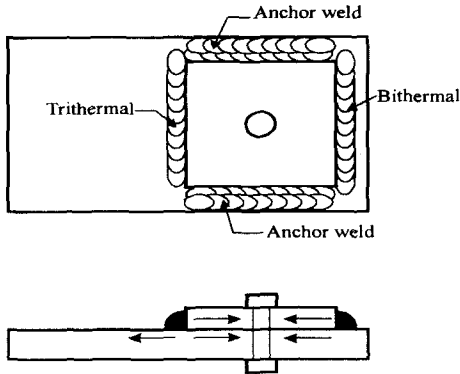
CTS testing method (position of anchor weld, bithermal, and trithermal welding)
